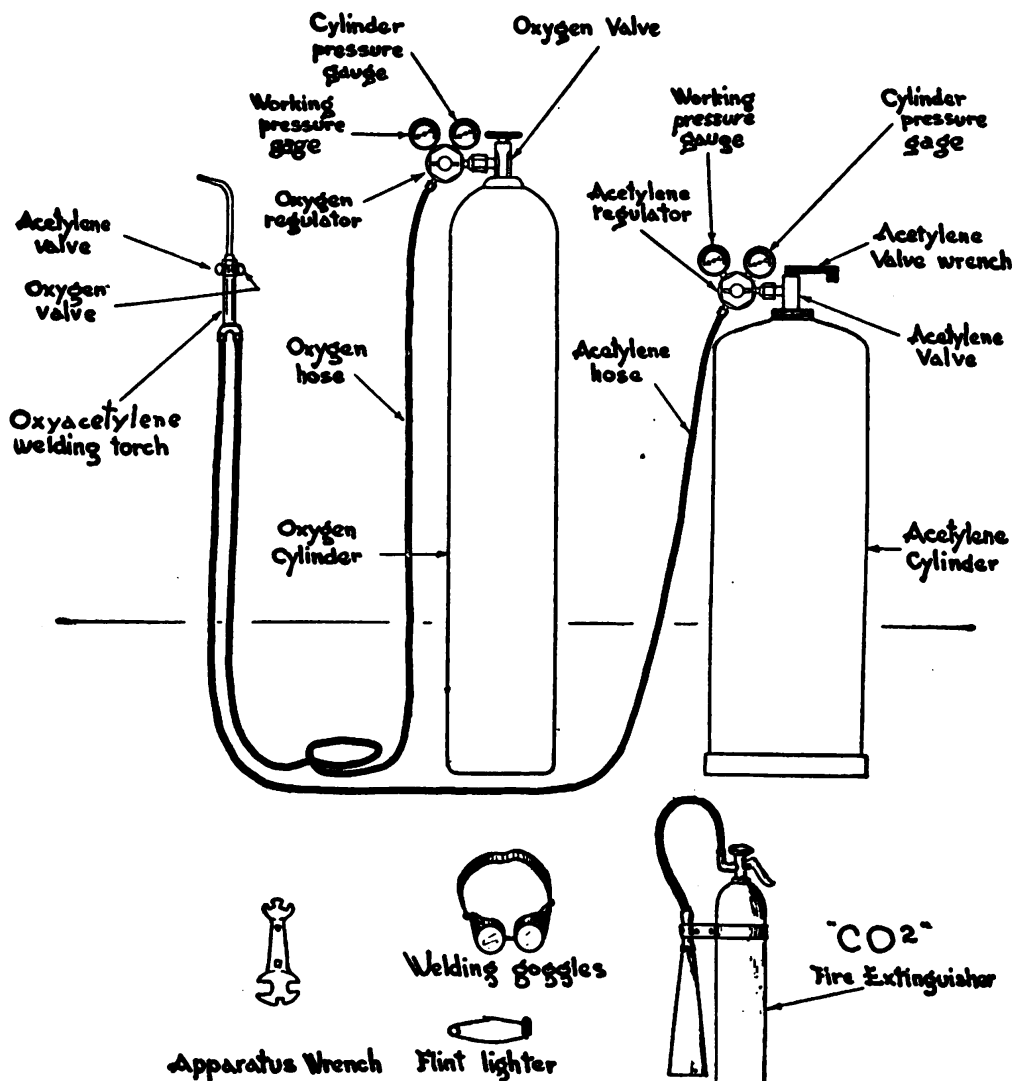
Portable oxyacetylene welding outfit.
